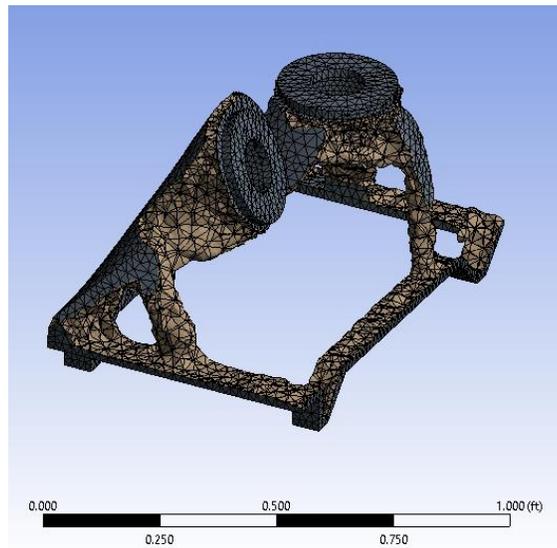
(left): Shows the mirrored corner of the optimized side piece.
